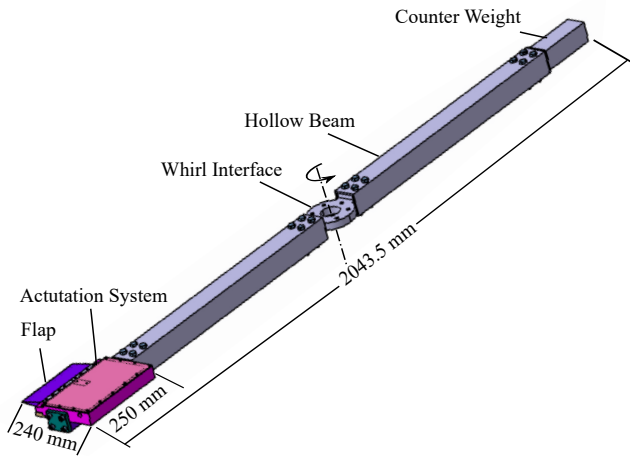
CAD MODEL OF THE DEMONSTRATOR.
